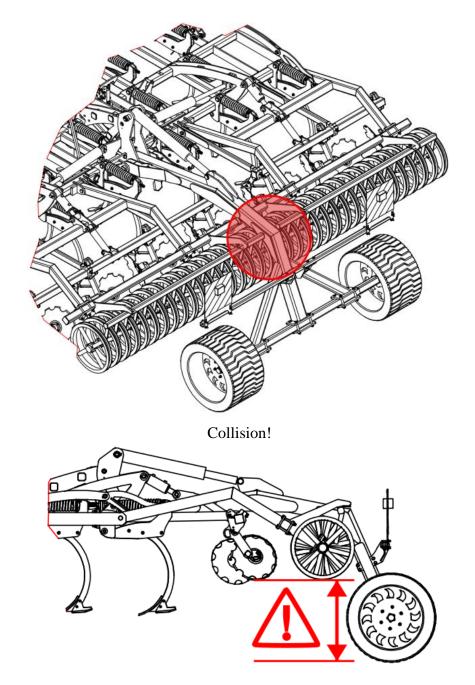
Incorrect height of roller assembly / collision when folding wings with the trolley
